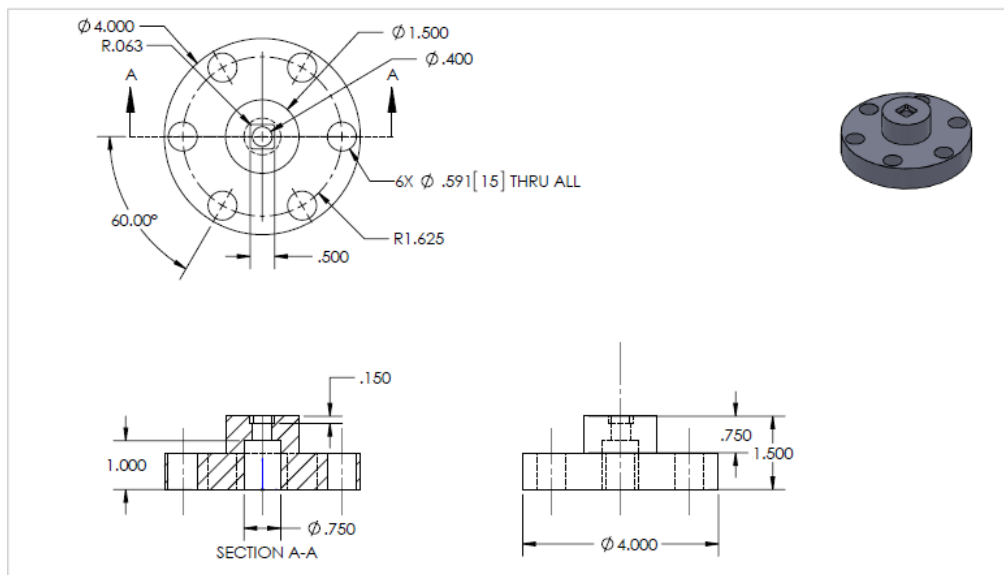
Schematic for fixture to adapt the X52 SNTT specimen.
